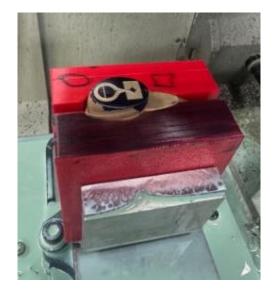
Finished product of Casting B with designed engravings and shiny polish.
